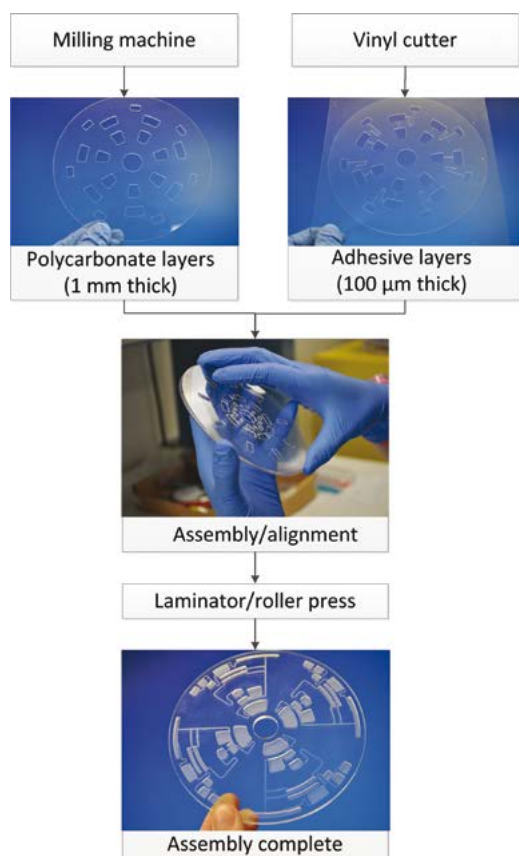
Illustration of microfluidic disc manufacture and assembly process
